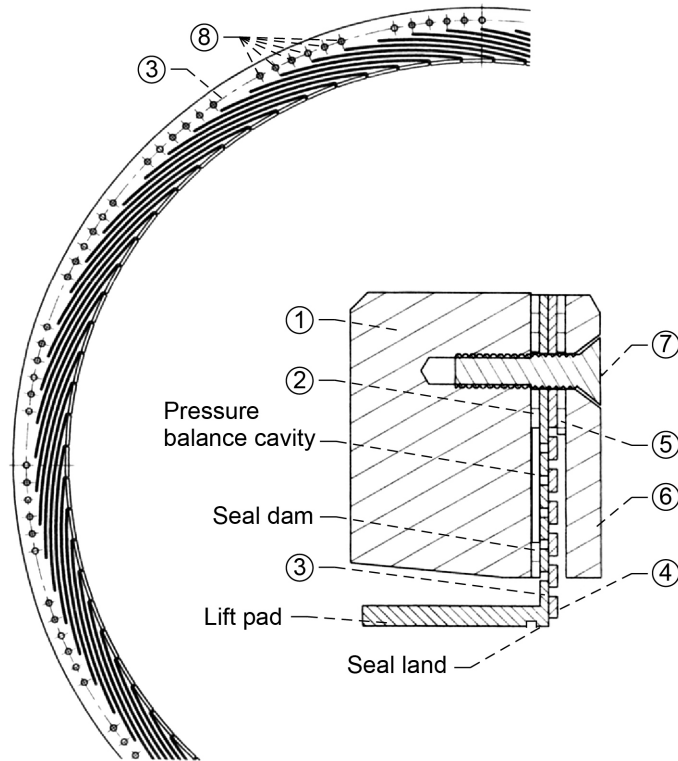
Noncontacting finger seal design: 1, back plate; 2, aft spacer; 3, aft finger element; 4, forward finger element; 5, forward spacer; 6, front plate; 7, screw; 8, indexing and screw holes.
